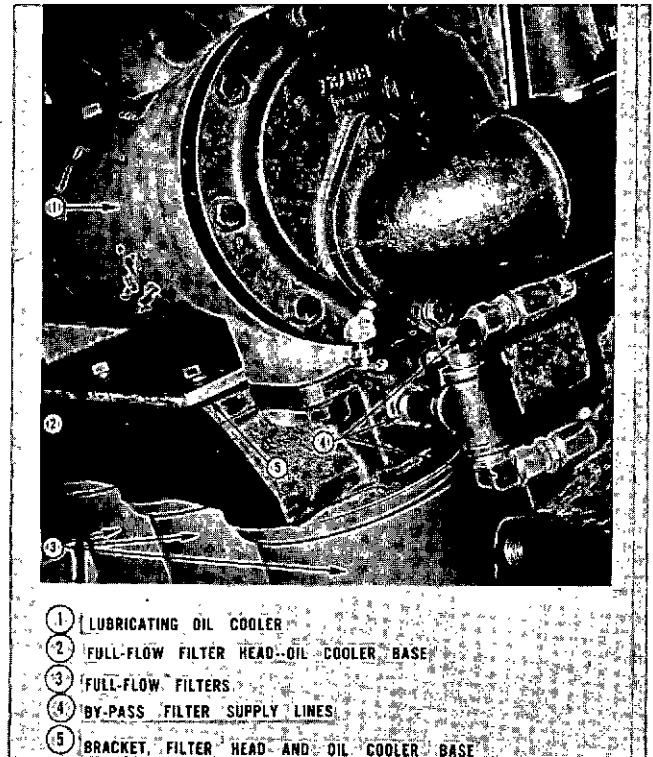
, V40735. Mounting by-pass filter supply line
